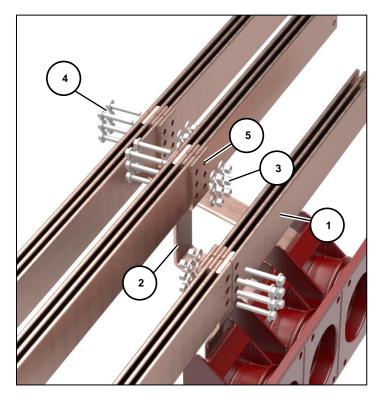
Assembly of 3150 A / 4000 A busbar, feeder  $\leq$  1250 A, Ur  $\leq$  12 kV
